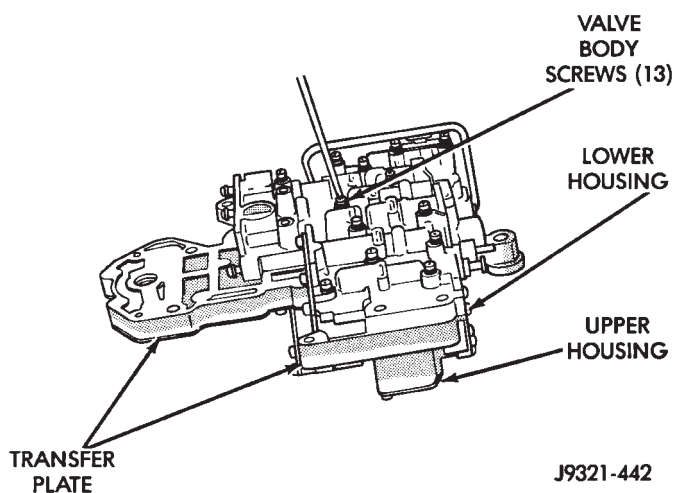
Installing Transfer Plate On Upper HousingFig. 76 Lower Housing Separator PlateUPPER HOUSING VALVE AND PLUG
